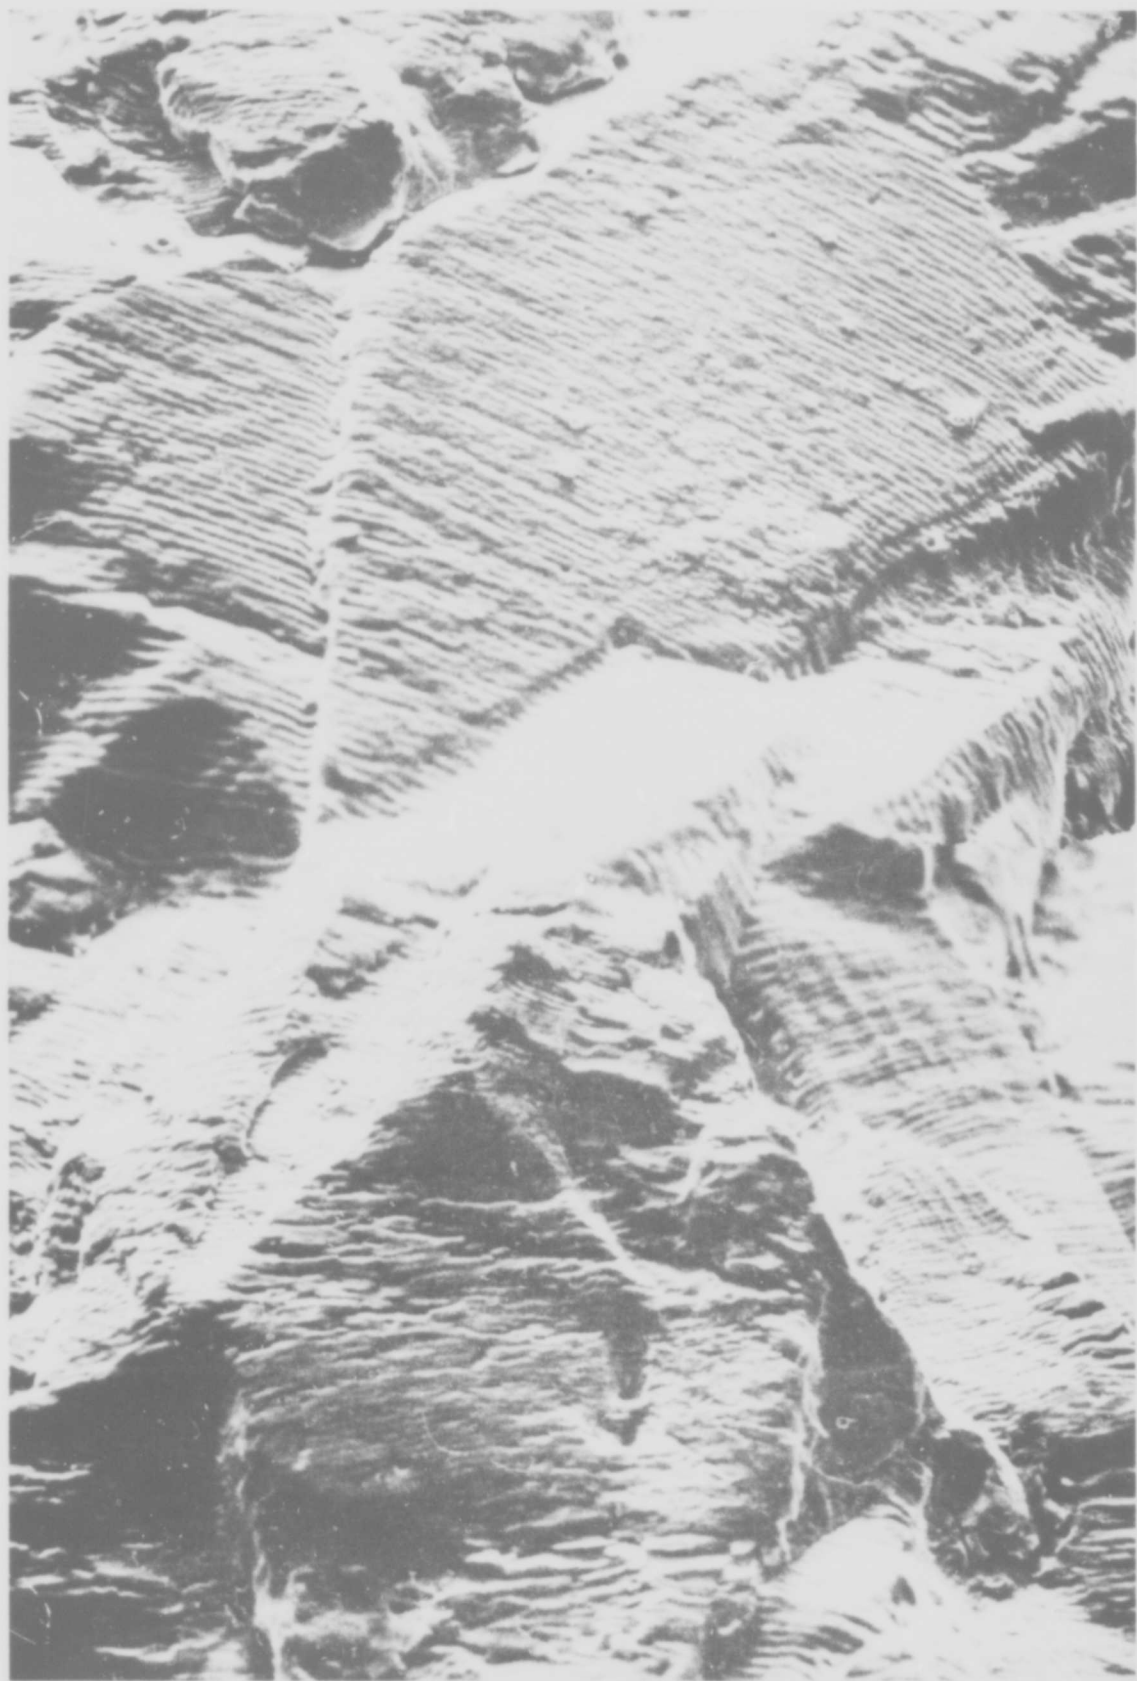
Micrographic aspect of a fatigue fracture surface in a stainless austenitic steel 25-20,
